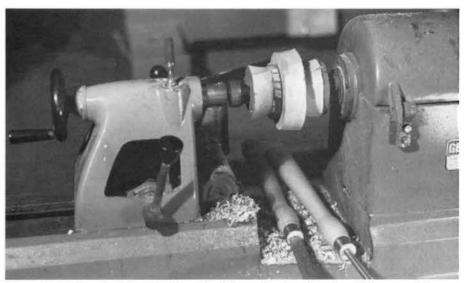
After checking the fit of the inlay, glue in when the fit is snug. Bring up the tailstock to clamp the two pieces together.
